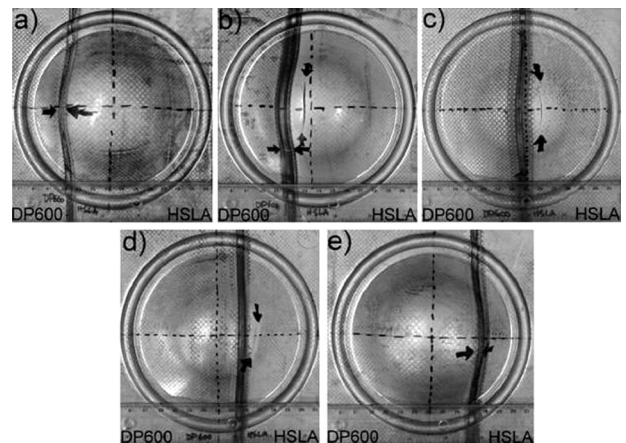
Biaxial-stretch formed DP600-HSLA laser welded coupons with different weld locations from center: (a) -30 mm, (b) -15 mm, (c) center, (d) 15 mm, and (e) 30 mm
